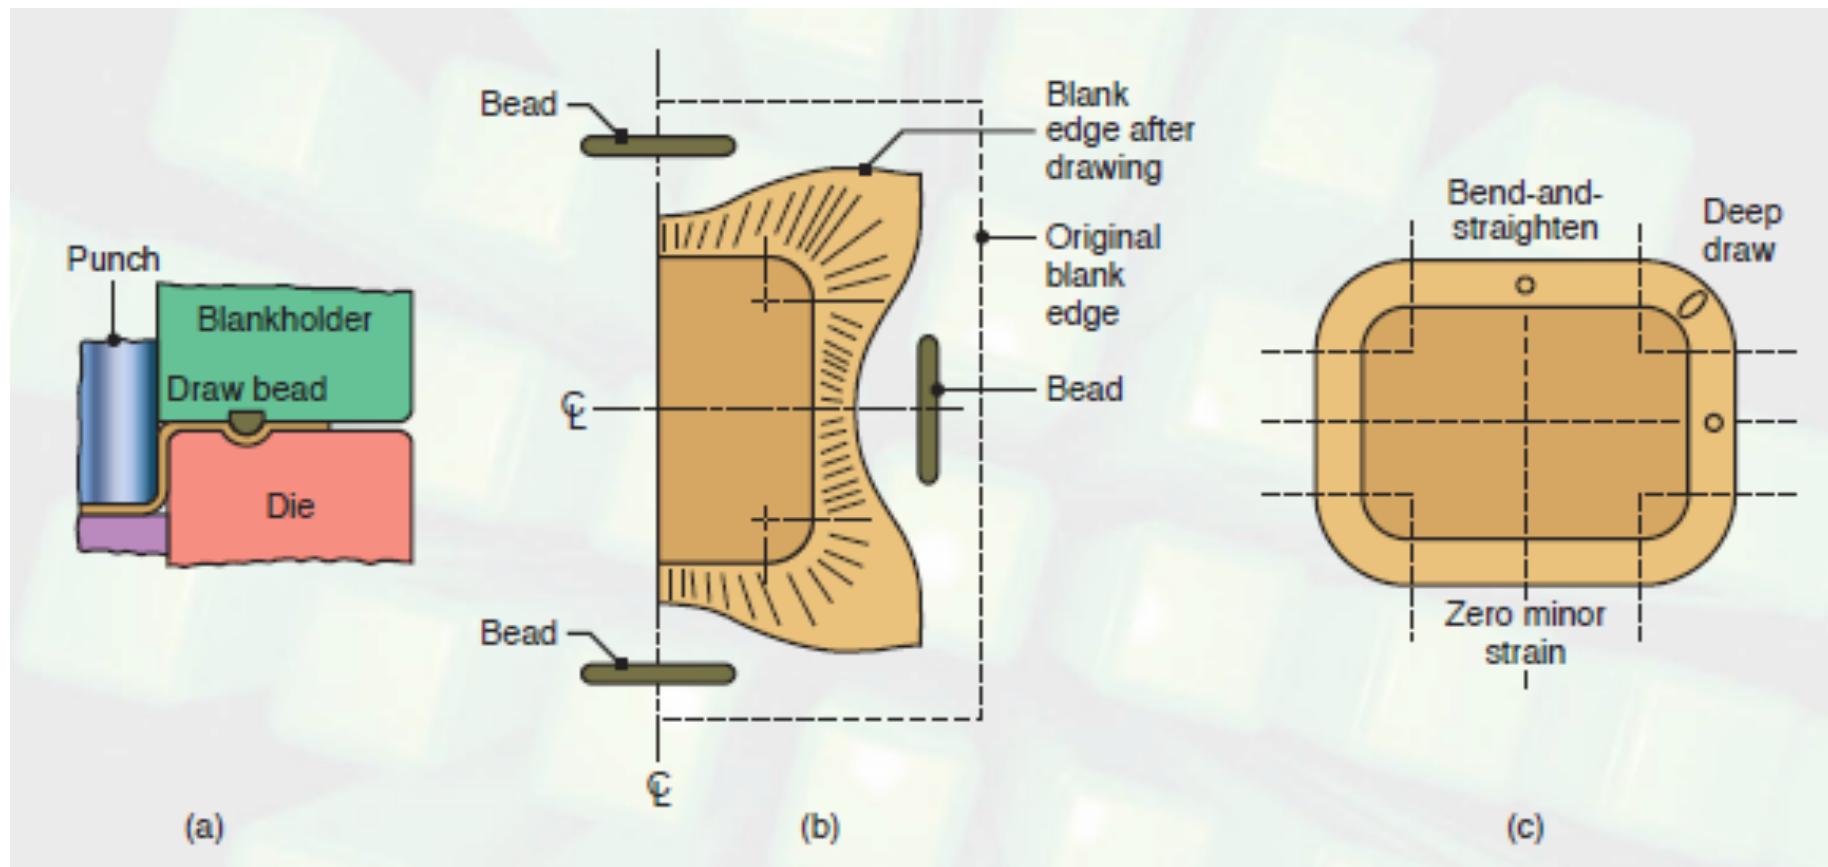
FIGURE: (a) Schematic illustration of a draw bead. (b) Metal flow during drawing of a box-shaped part, using beads to control the movement of the material. (c) Deformation of circular grids in drawing. (See Section 7.7.)
